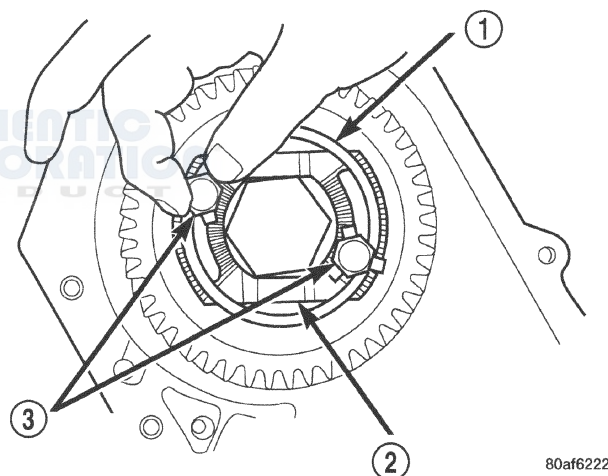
Output Gear Retaining Bolt Stirrup (Serration Side Out)
